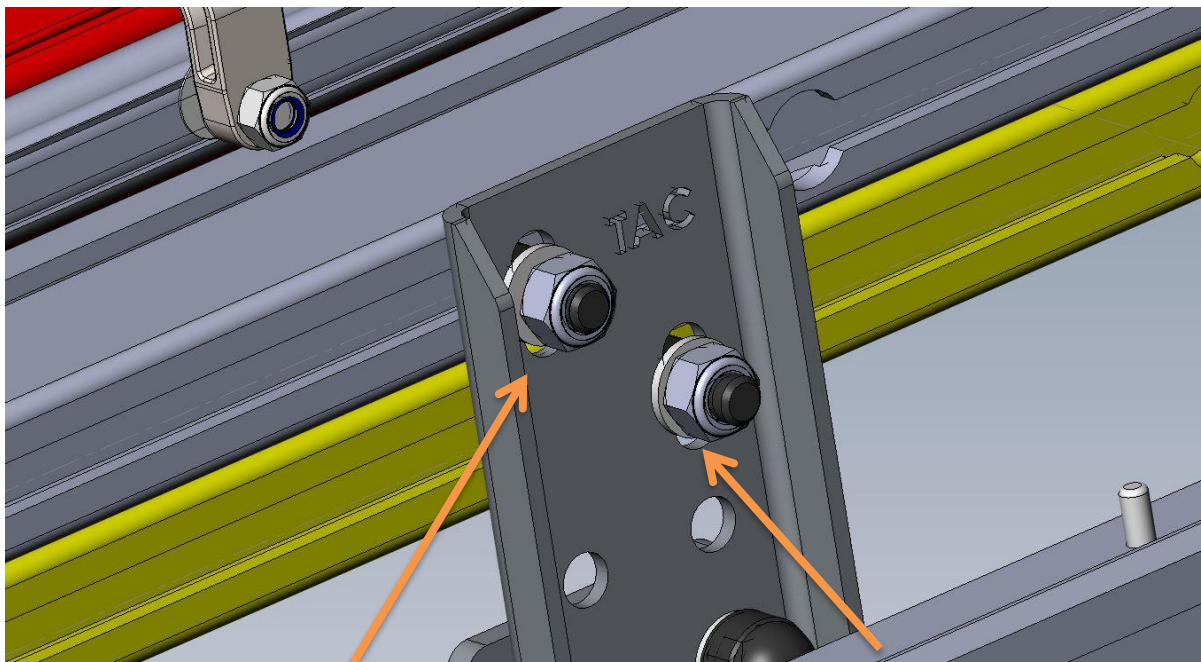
Next we need to place the Hex Bolt in the Nut Slot and place a Flat Washer afterwards. Fit nut caps to all bolt heads
